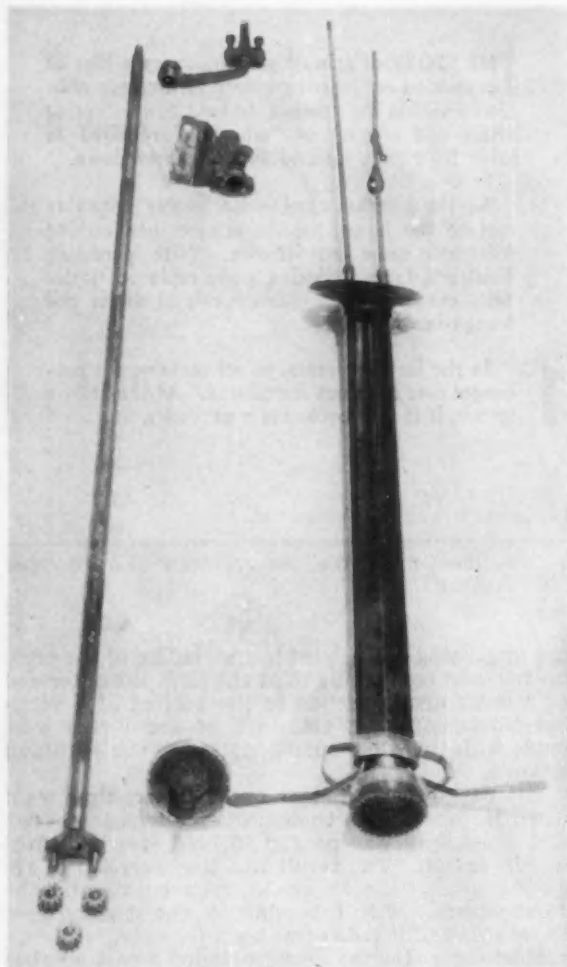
Model T steering gear was the only one of its kind. Steering wheel rotated the driving member of a set of planetary gears in a small gearbox located directly below the wheel. The driven gear was fast to the shaft with ratio such as to make speed of shaft much less than that of the wheel.
